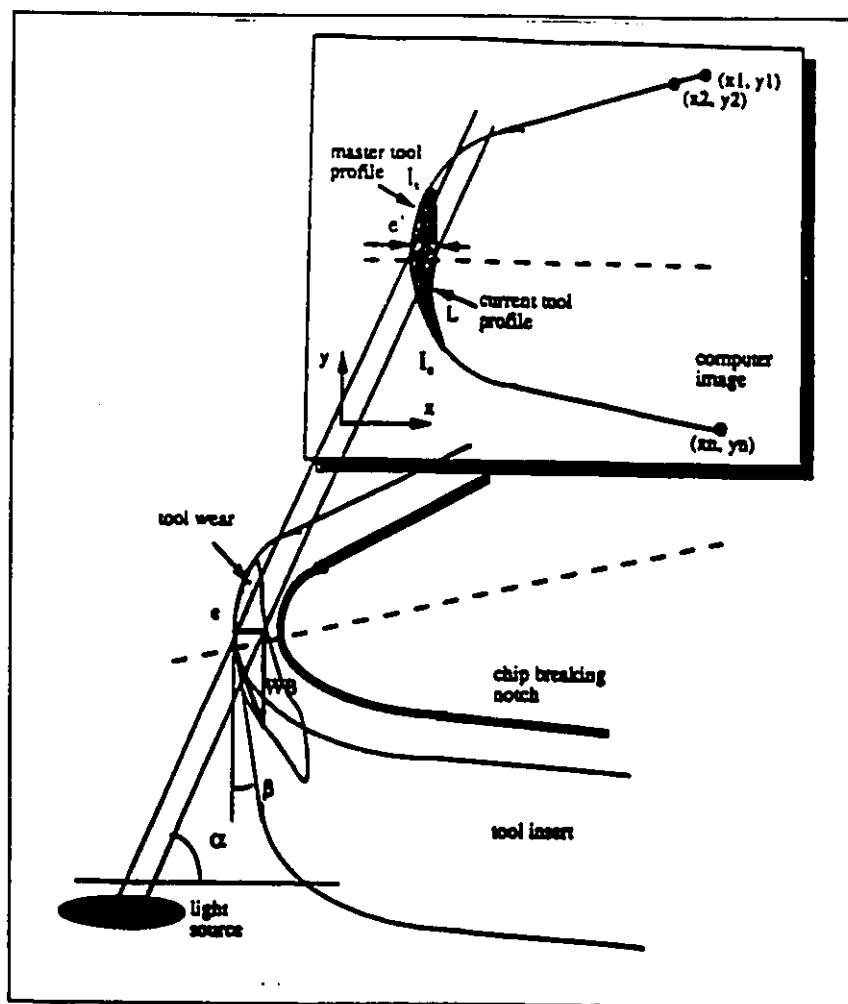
Different Tool Condition Indices for Tool Tip Sensor.
